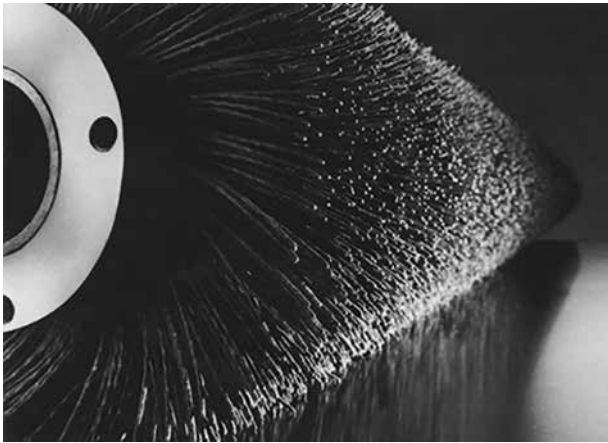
Wide-Faced Cylinder Brush Cleaning Steel Coil Prior to Coating Operation
